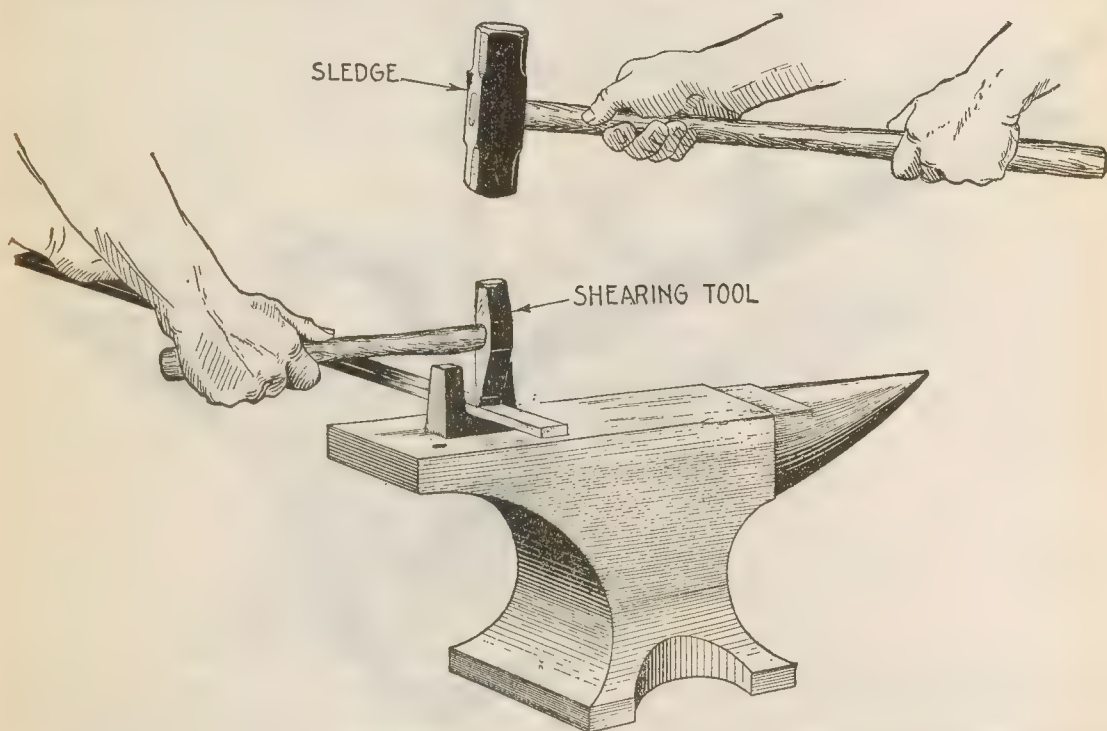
,948.—*Cutting 5.* With bending fork and sheering tool. Place bending fork in hardy hole and insert the piece to be cut between the two fingers of the fork. Hold sheering tool against side face of fork and shear off piece by blows delivered by helper with a sledge.
